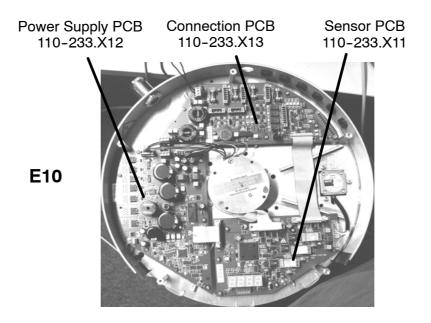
Arrangement of PCB's in the STD 22 Compass (cover removed)
